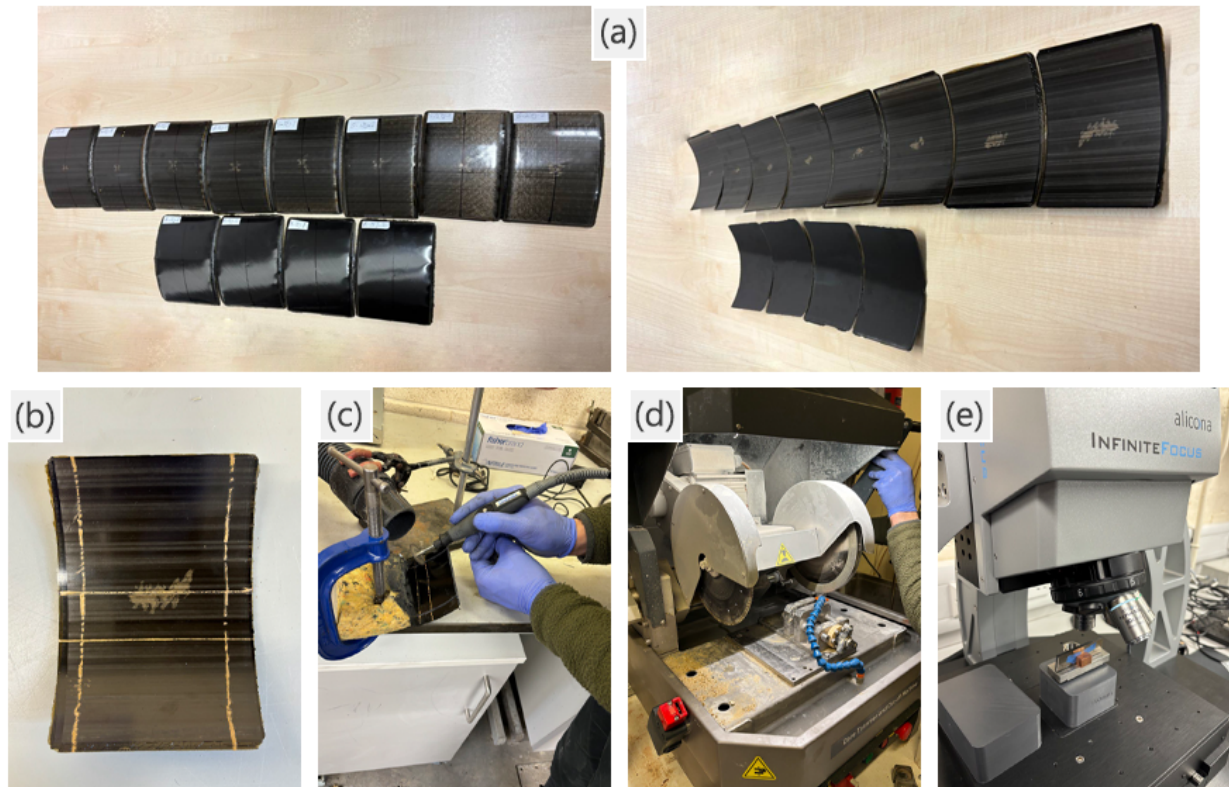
Sample preparation process for internal damage analysis under microscope: a) post-impact test samples, b) marking the sample for targeted sectioning, b) utilising a Dremel with a cutting disk optimised for carbon fibre composites, c) polishing the cross-section to enhance surface quality, using both machine and papers with wet/dry process, d) capturing microscopy images of the prepared cross-section
